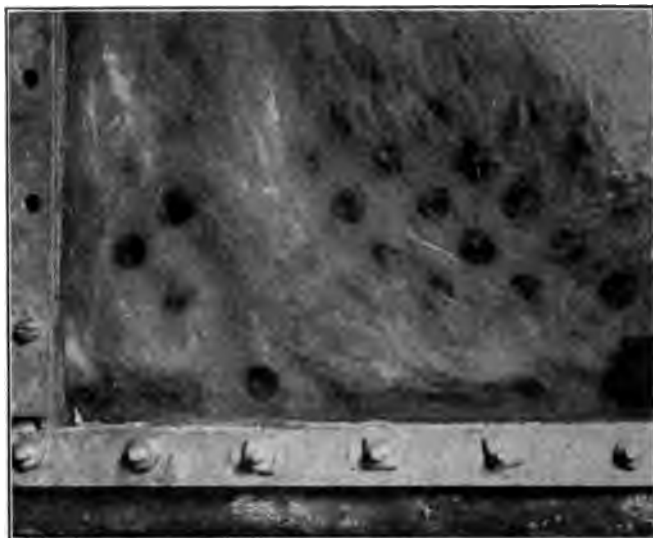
SHOWING LOWER SECTION OF SAME BOILER AS IN FIG. 14; LOAD 250 PER CENT; SETTING AS IN FIG. 8b
